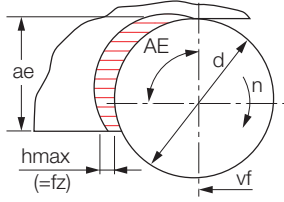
Face milling with depth of cut no more than the radius of a milling cutter
